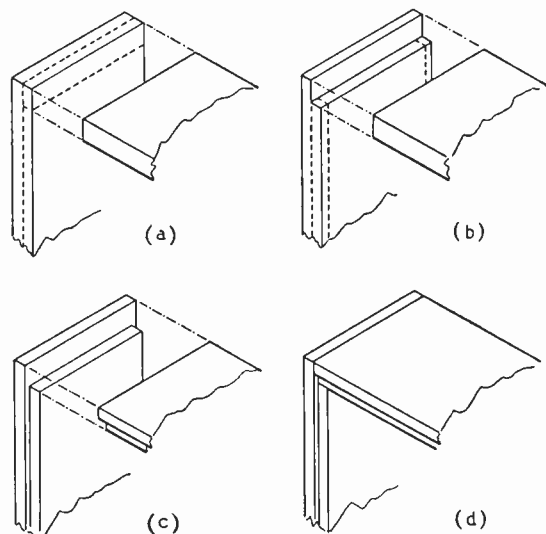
Steps in construction of corner joint: (a) marking out for rebate, (b) end rebate cut to depth of top members (c) side rebates cut to receive panels and (d) assembled joint.
